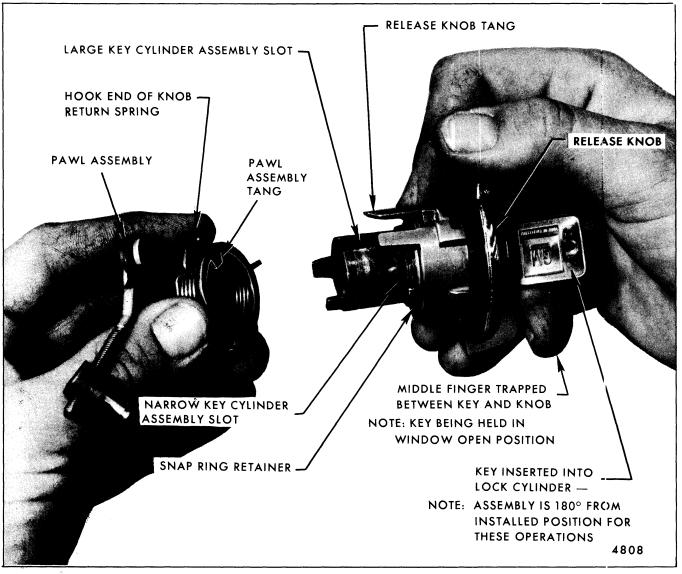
Loading Pawl - Spring Assembly to Key Cylinder
